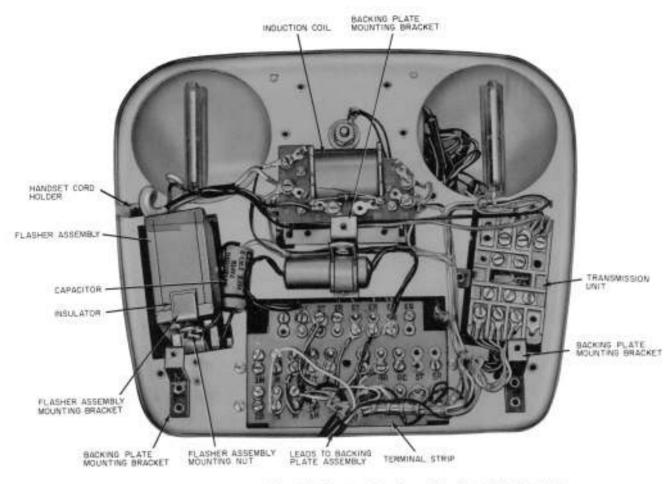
Main unit assembly with the upper housing and backing plate removed,
